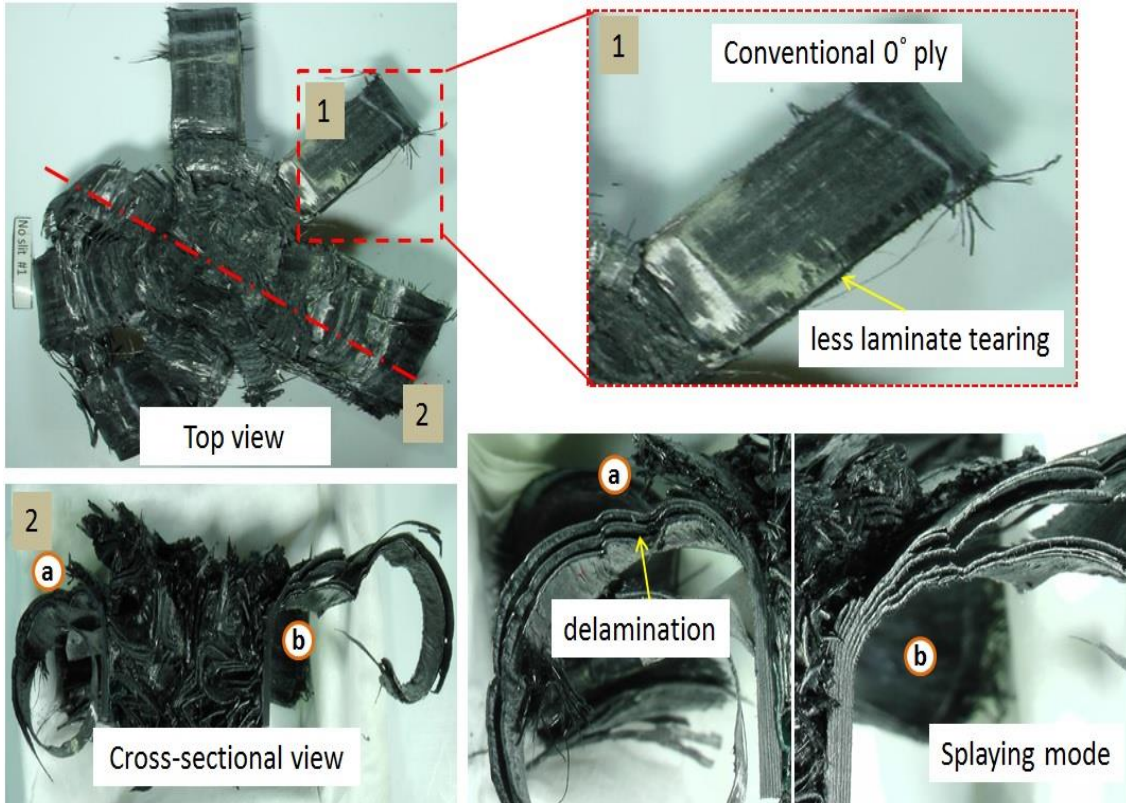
Photograph of final crushed shape and cross-sectional view of conventional tube.
